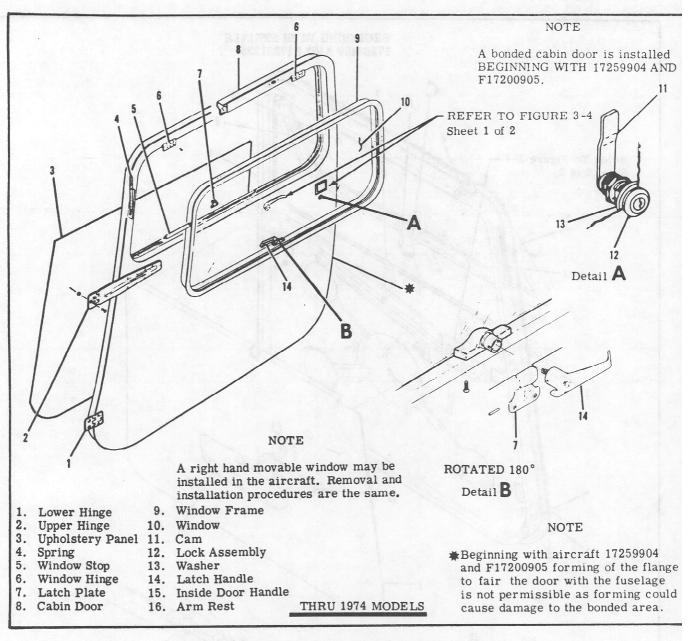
Cabin Door Installation (Sheet 1 of 2)
